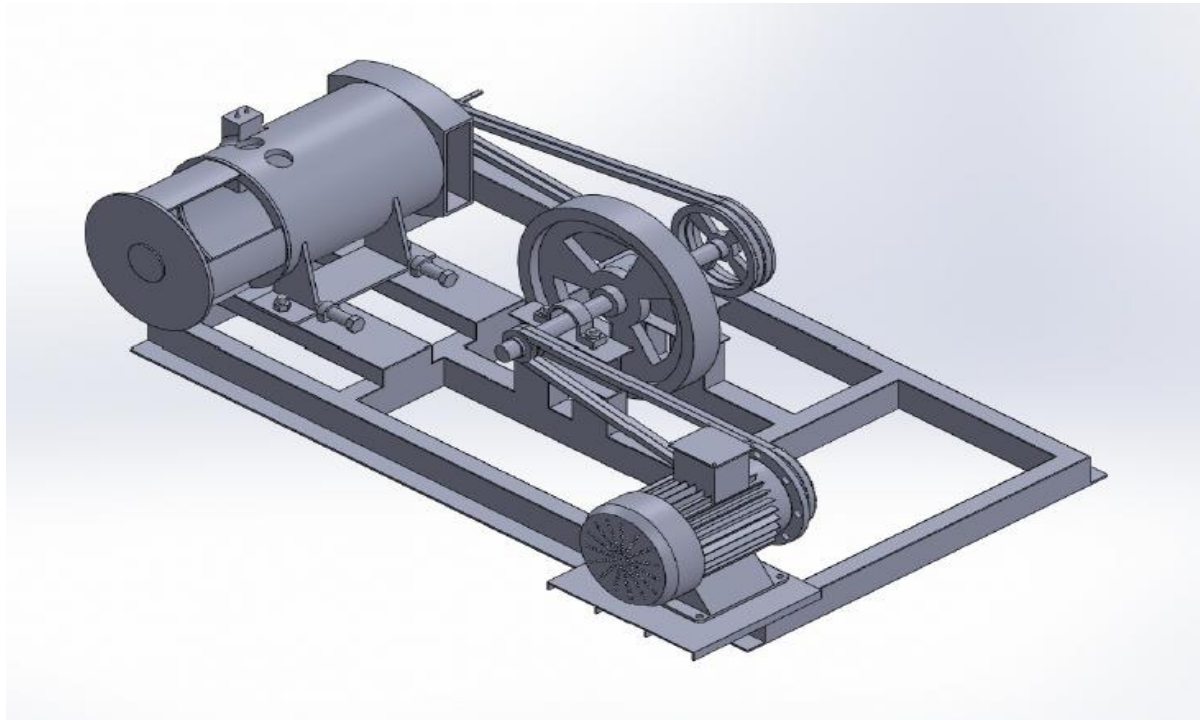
Assembly Drawing of the Fuel-Less Generator
